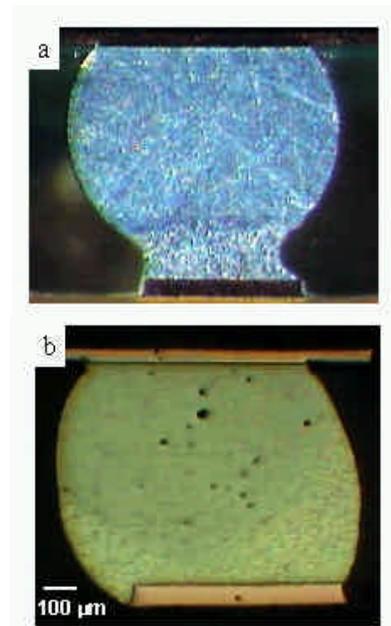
SEM Micrograph of the PCB Side of a Pb-free BGA Assembly, Showing the Cu pad, the Bi-42Sn-1Ag Solder Paste and the High-Sn Ball After Reflow for (a) About 4000 mils³ of Bi-42Sn-1Ag Solder Paste and (b) About 9500 mils³ of Solder Paste
